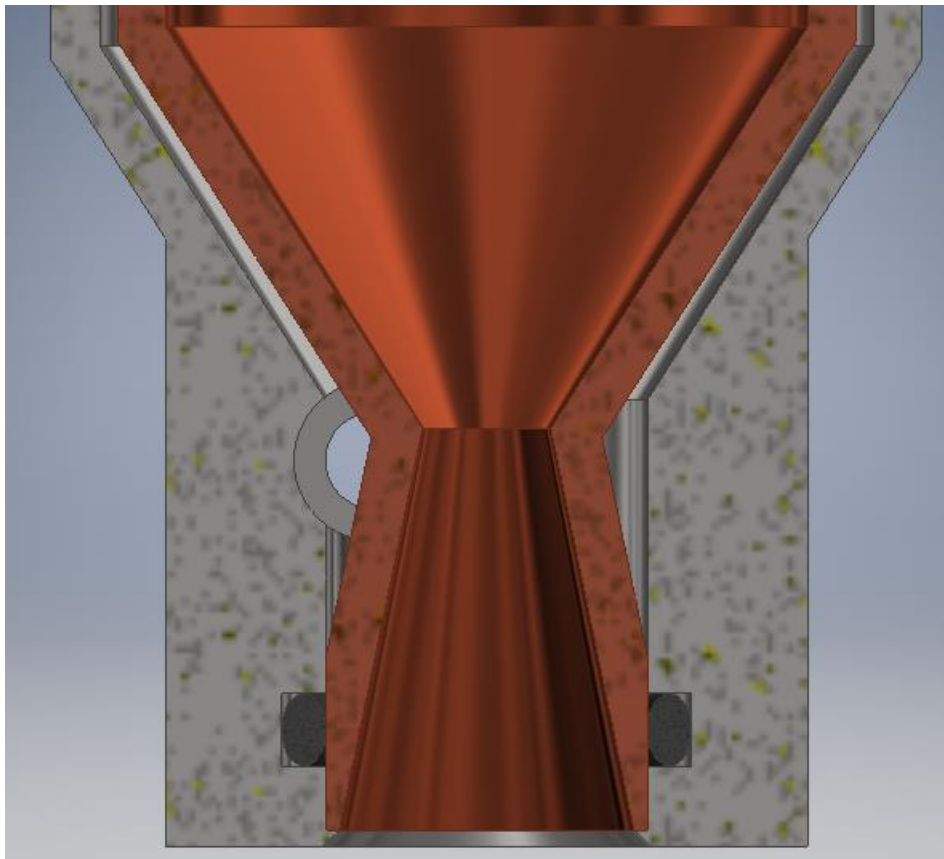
Nozzle detail cut with visible offset coolant intake
